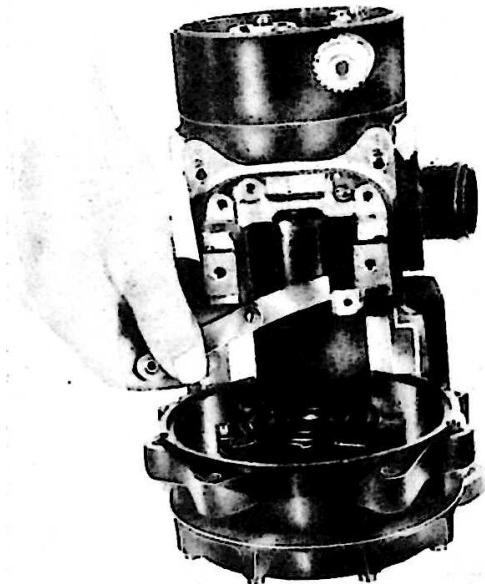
Checking Clearance Between the Rotating Magnet and the Pole Shoes.
